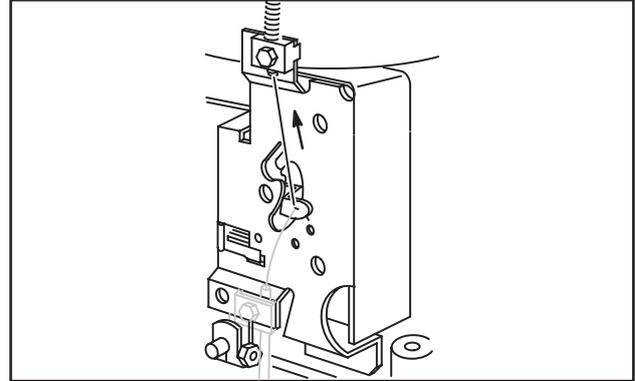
Late Style, 170700, 171700, 190700, 191700, Swivel Control Bracket for Briggs & Stratton One Piece Flo-Jet Carburetors
